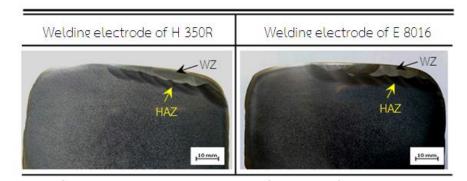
Examine the cross-section surface with penetrant testing (PT)
